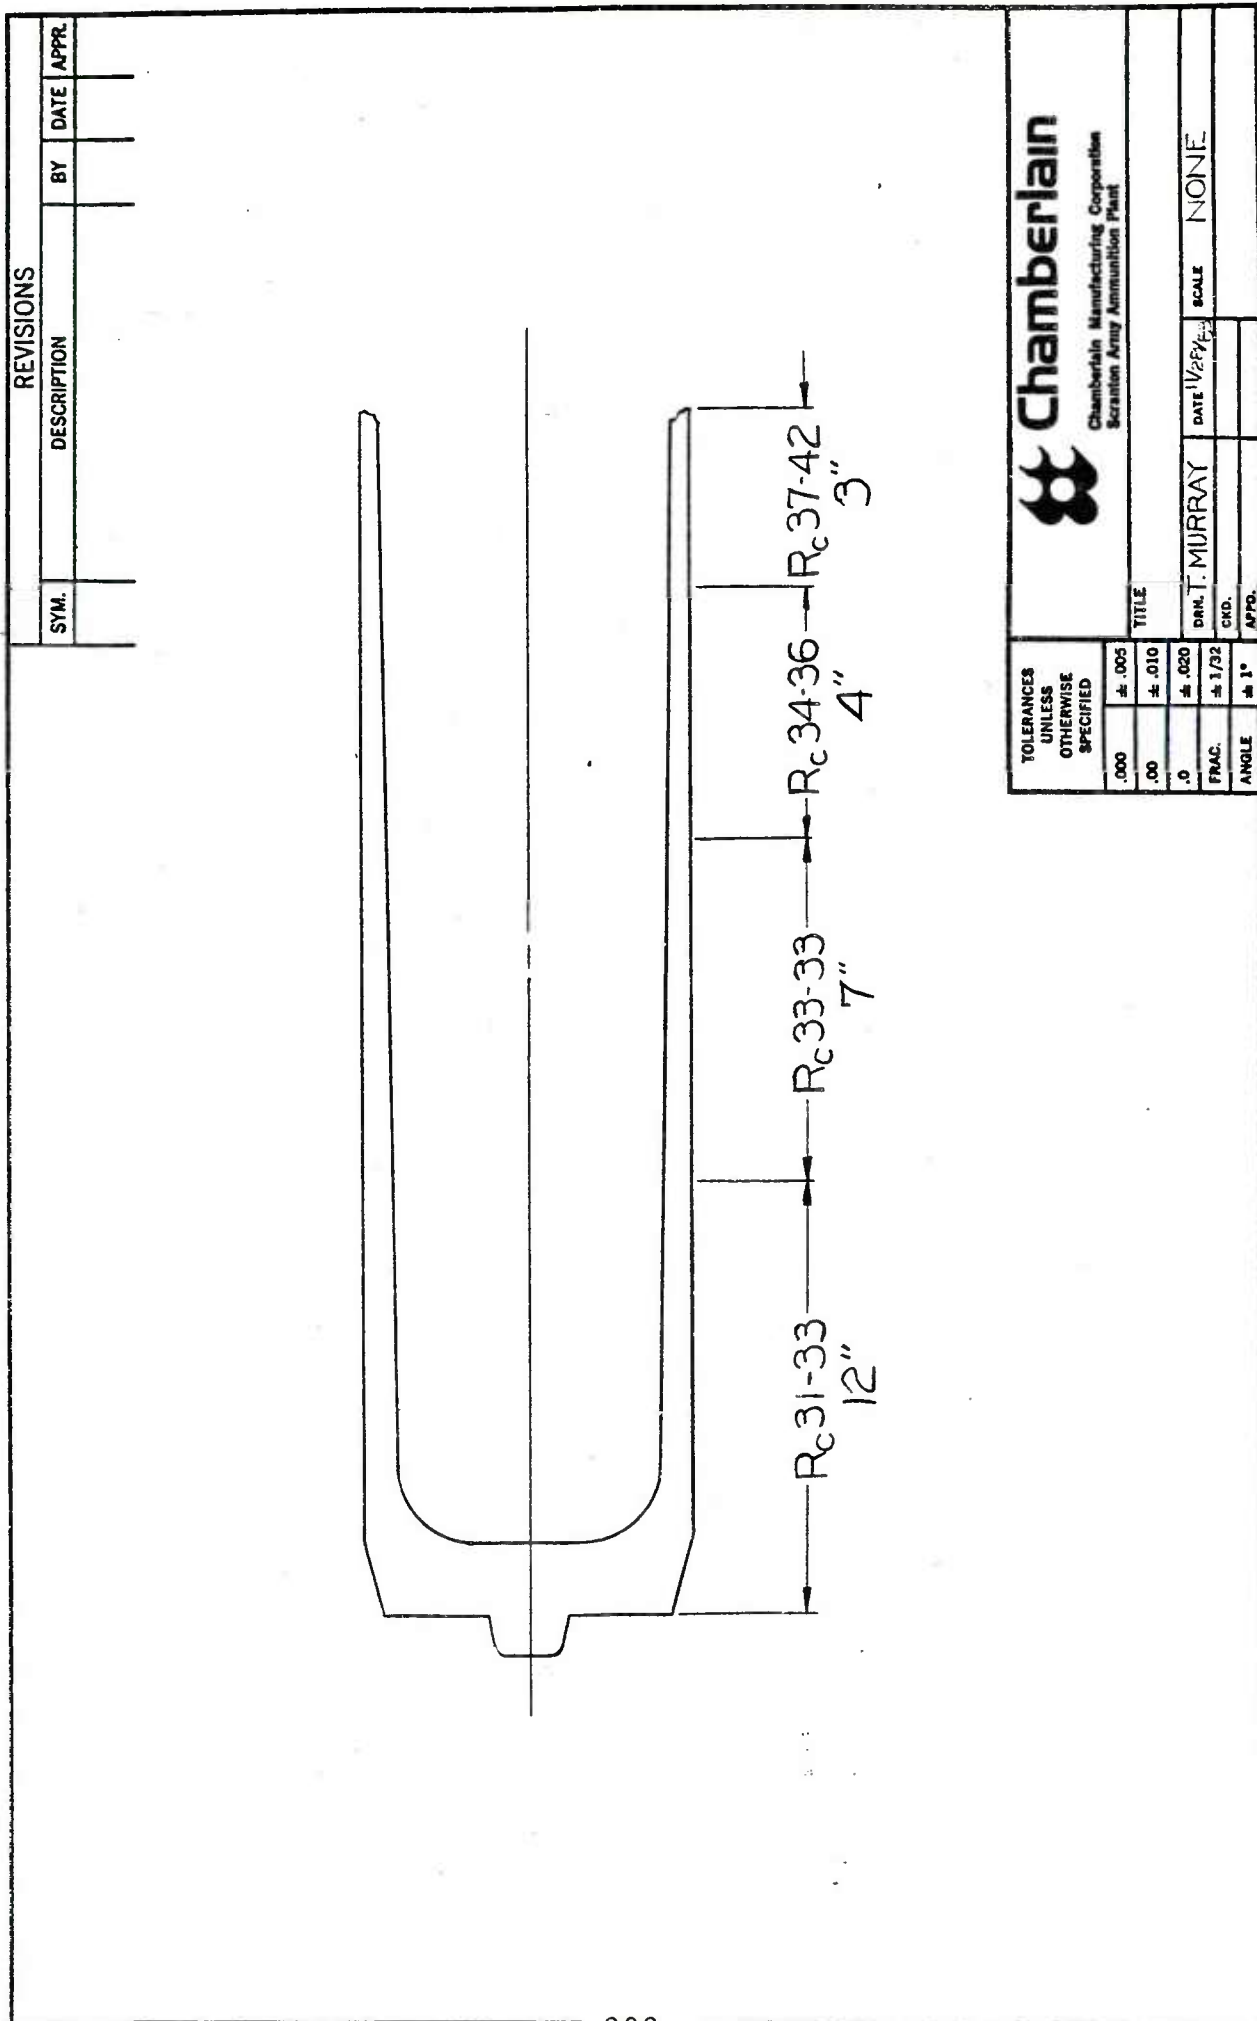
Bethlehem 2B steel forging - hardness pattern "bung cooled".
